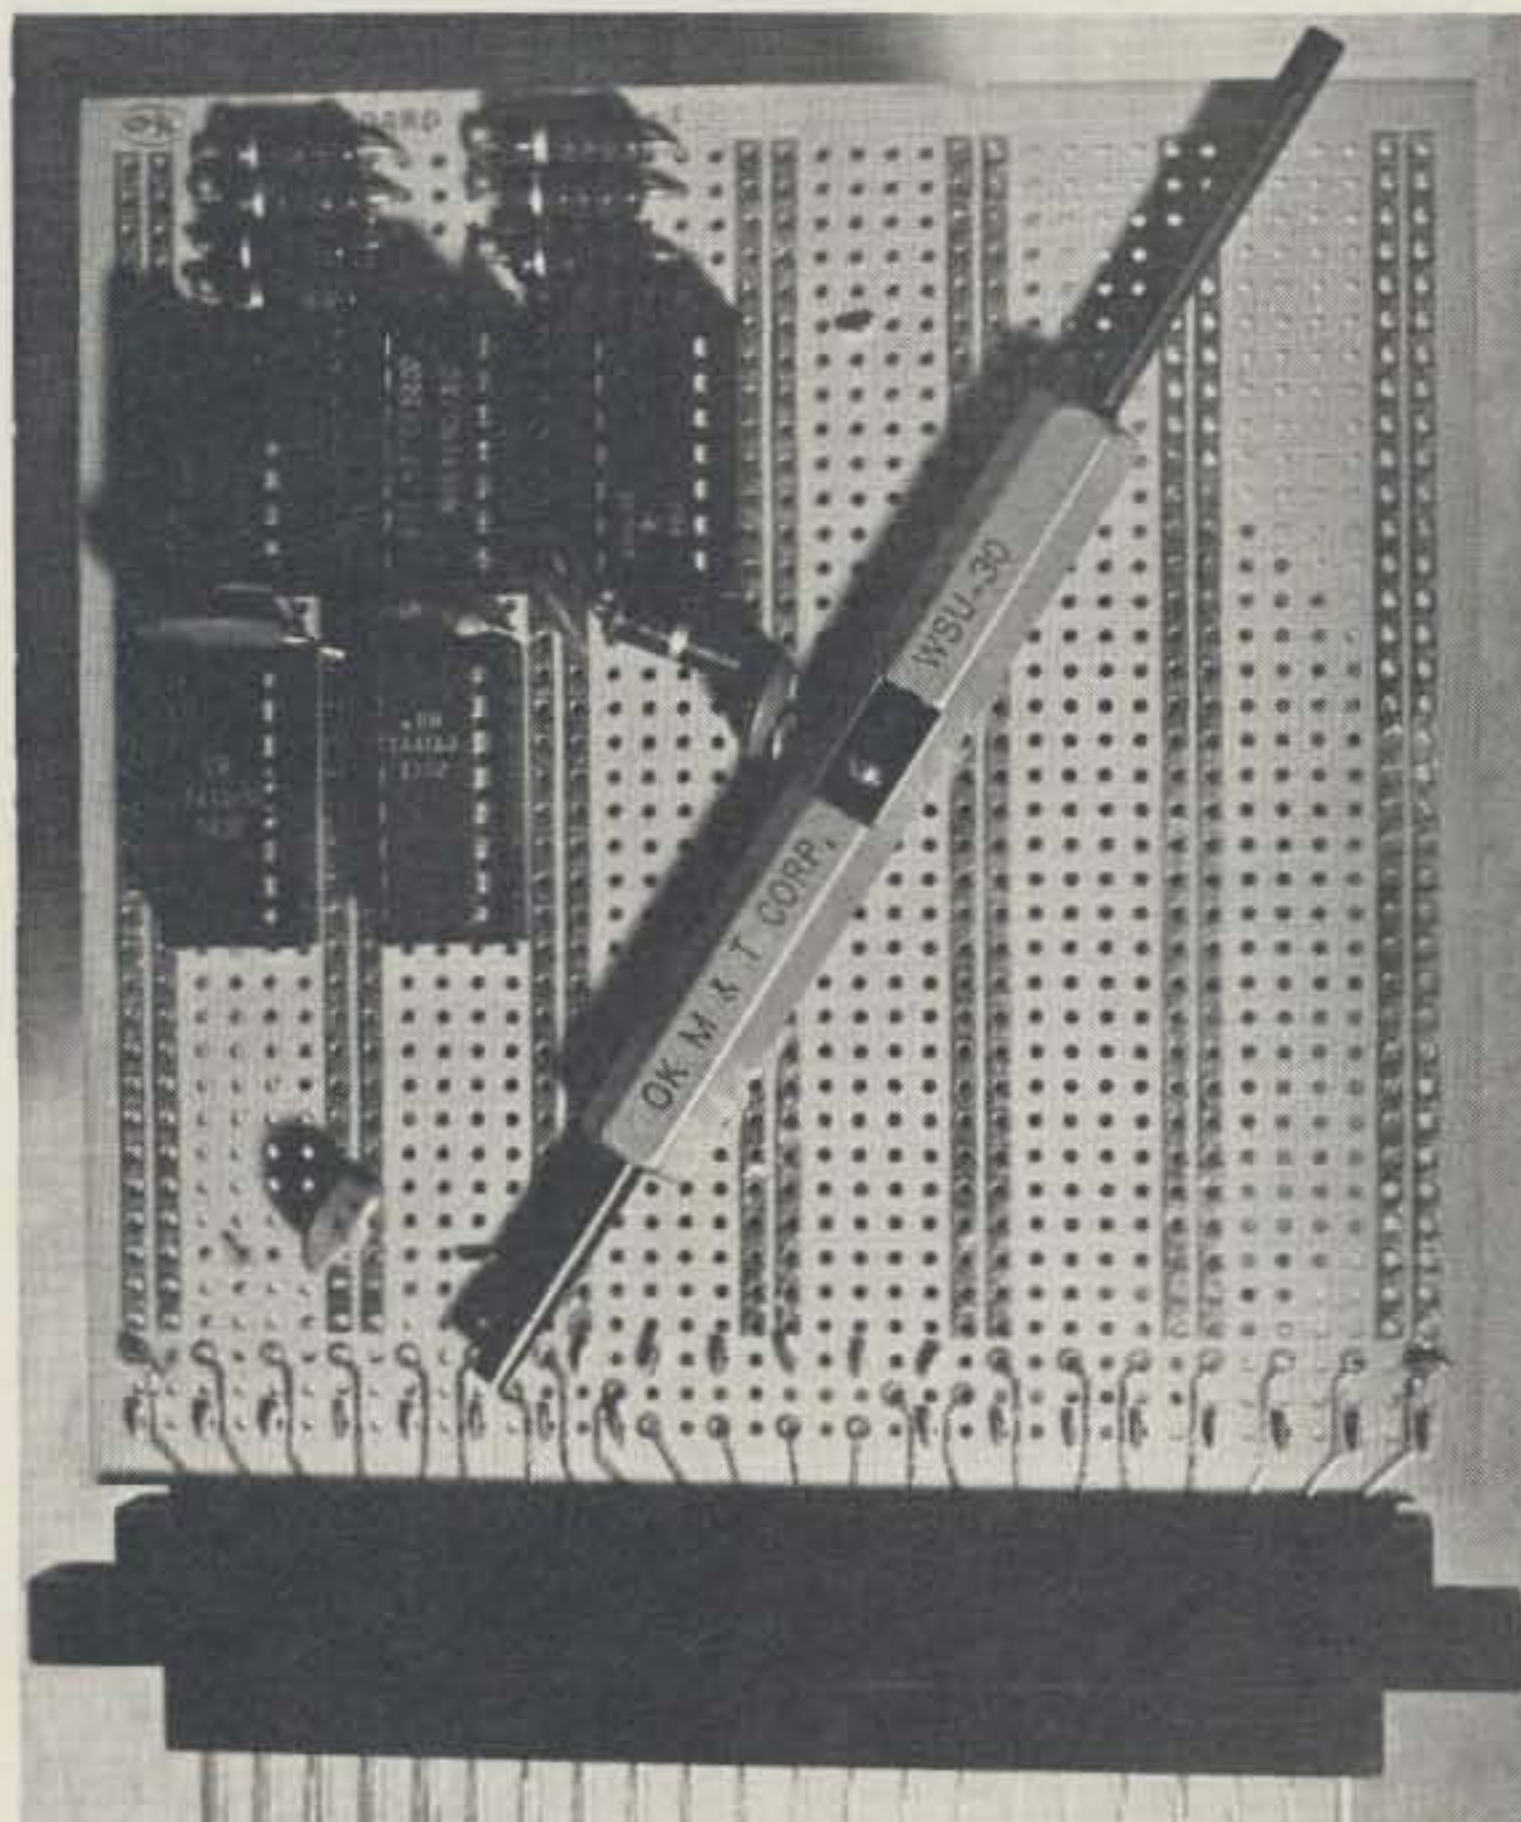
Photo C. The scanner only takes up a small area on the Hobby Board. The wrapper, also by OK Machine & Tool, tied it all together.
